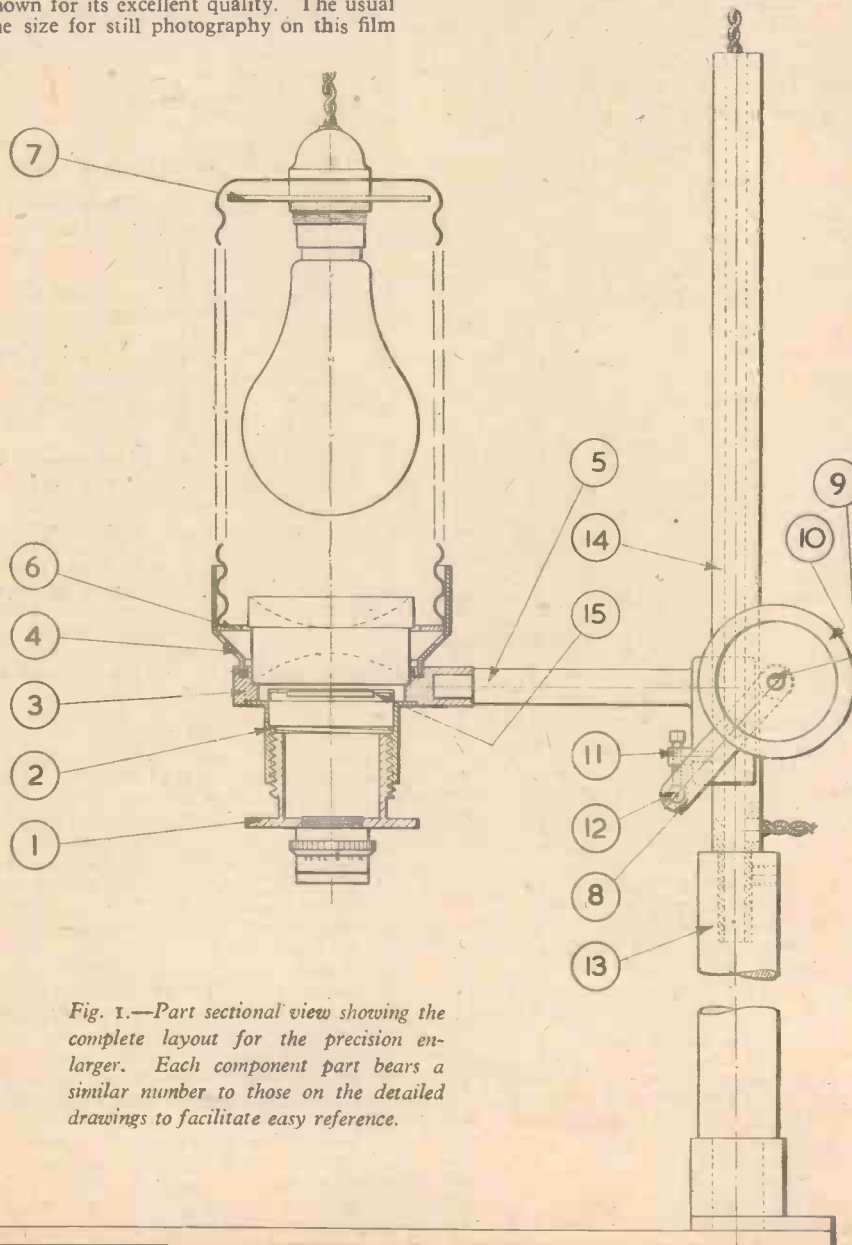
Part sectional view showing the complete layout for the precision enlarger. Each component part bears a similar number to those on the detailed drawings to facilitate easy reference.
